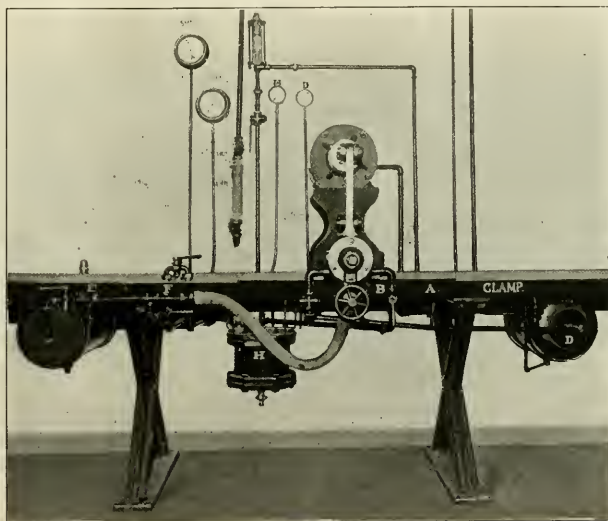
TRIPLE VALVE TESTING DEVICE, GREEN ISLAND SHOPS, DELAWARE & HUDSON RAILROAD.—COURTESY OF A. BUCHANAN, JR., MASTER MECHANIC.
